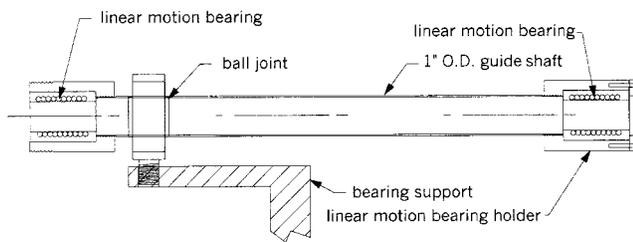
Mechanical drawing of the ball joint bearing and guide shaft assembly. The principle direction of angular motion is in the plane normal to the drawing.
